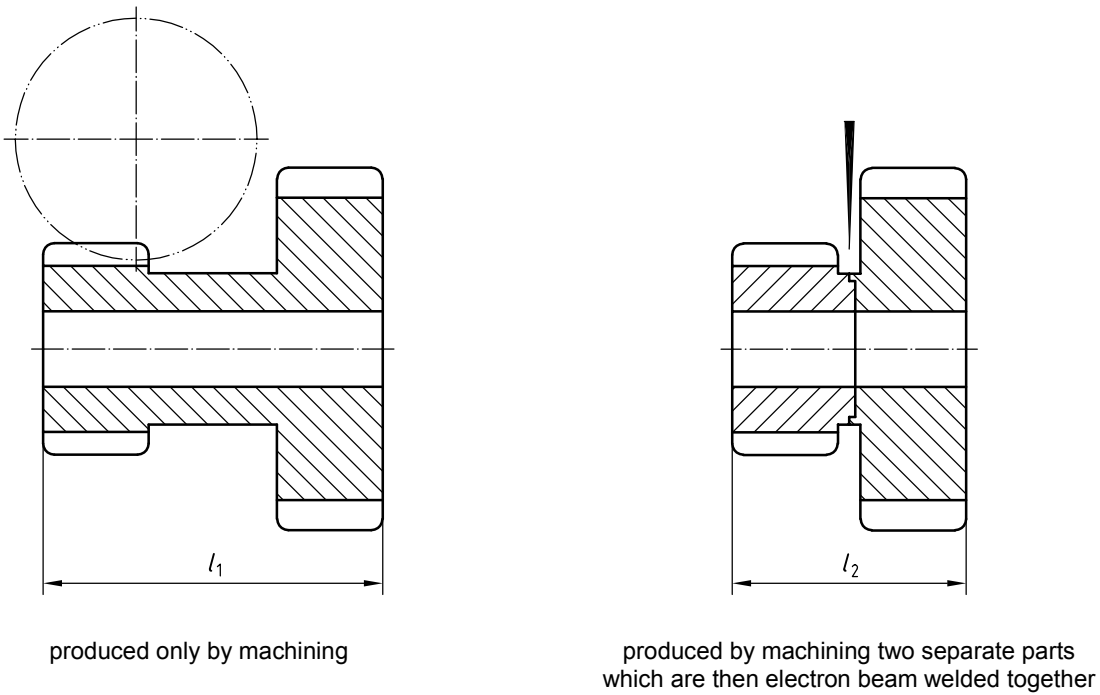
Effect of the method of manufacture on the dimensions of gear wheels
